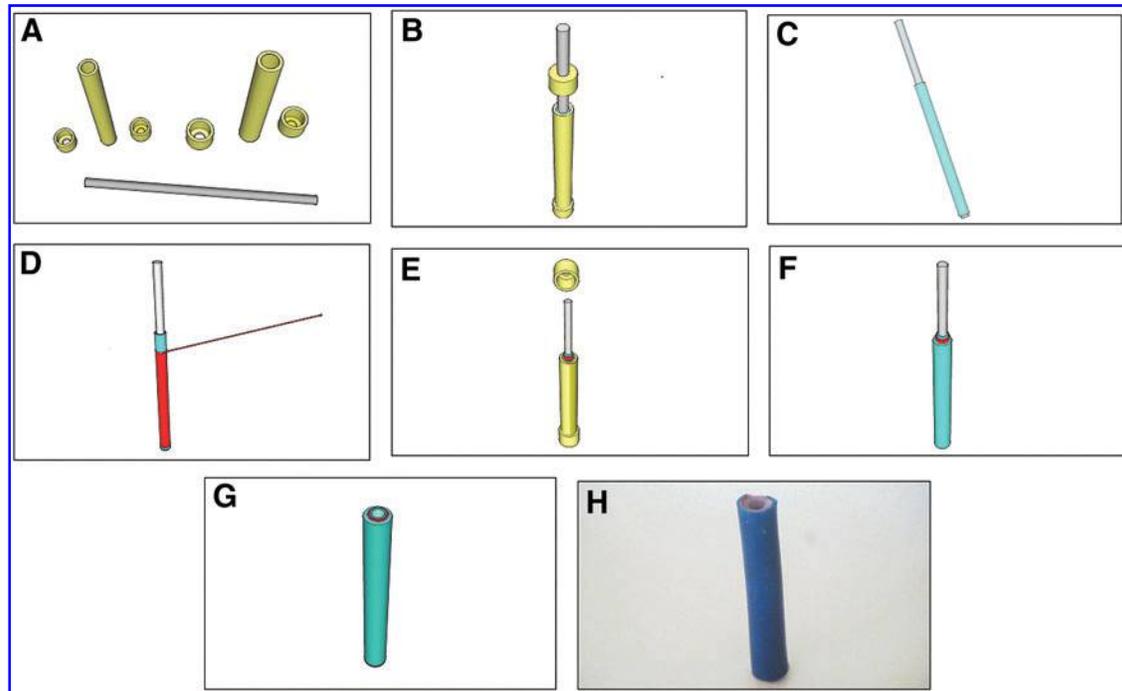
(A) Molds needed for construction. PVC pipes, caps, and aluminum rod. (B) Capped pipe is filled with Ecoflex rod is inserted. (C) Rod and Ecoflex removed from pipe. (D) Tube is wrapped with string. (E) Assembly is lowered into $\frac{3}{4}$ inch PVC pipe. (F) Pipe is removed after curing. (G) Rod is removed. (H) A completed tube. Color images available online at www.liebertpub.com/soro
